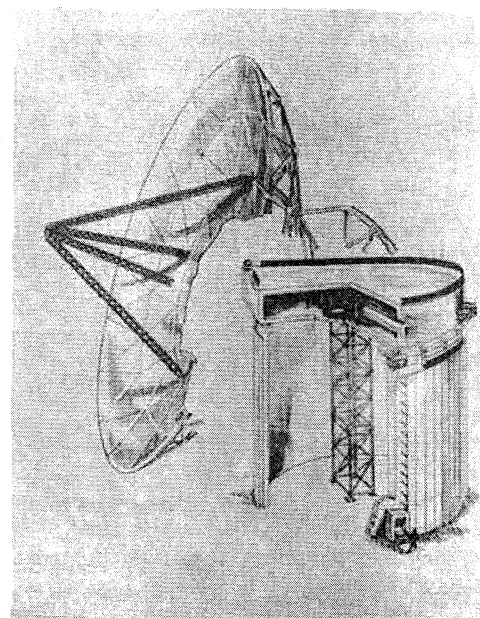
Cut-away view of Kennedy Design showing the torque tube connecting the altitude gear sectors.
